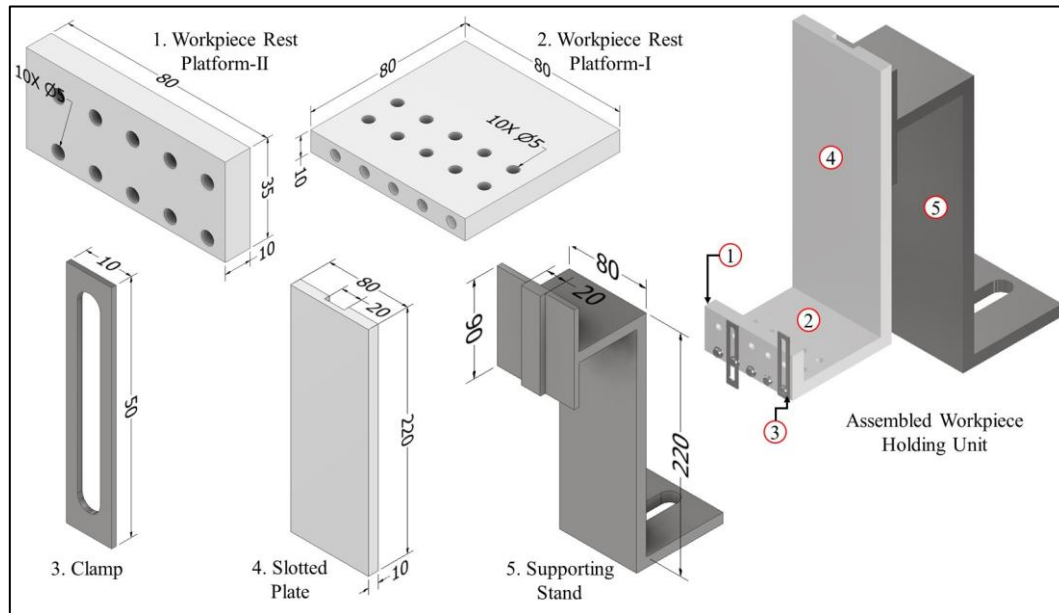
4 Elements of the workpiece holding unit with dimensions and assembled form
